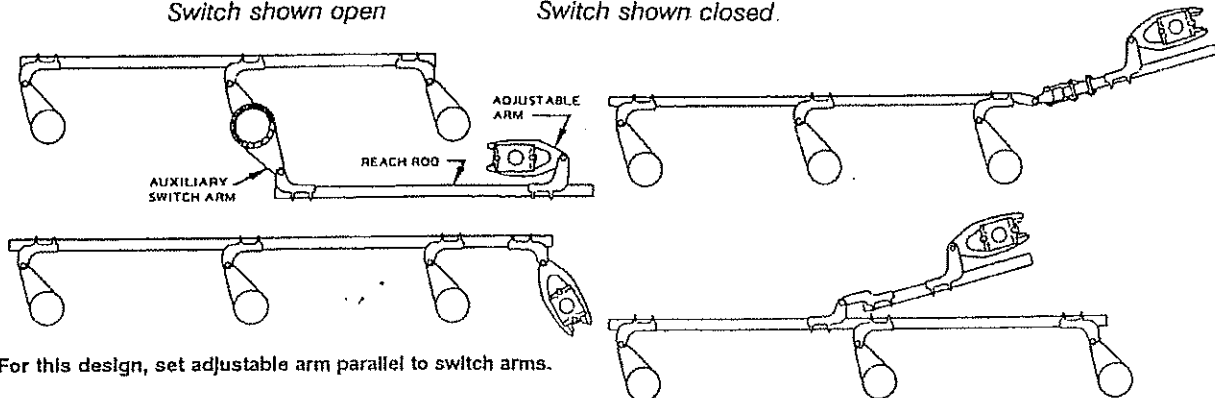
Typical vertical break switch installation. See the operating mechanism drawing for details specific to your switch.
